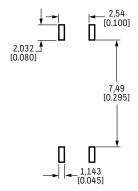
SMT Package Dimensional Drawings (For reference only: mm [in], continued.)
